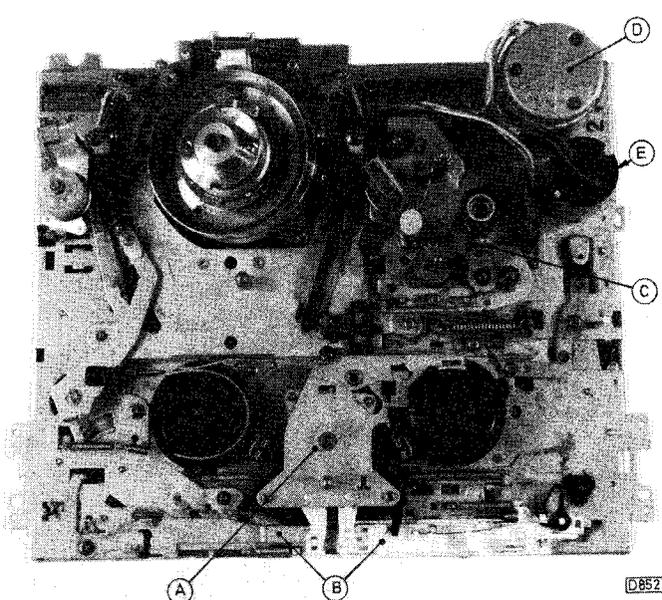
Upper deck with the cassette housing and head drum removed. The loading arms are in the half-laced position. Key: A forward/reverse drive idler assembly; B slide bars (operating levers); C reverse guide arm; D capstan motor; E loading motor.
